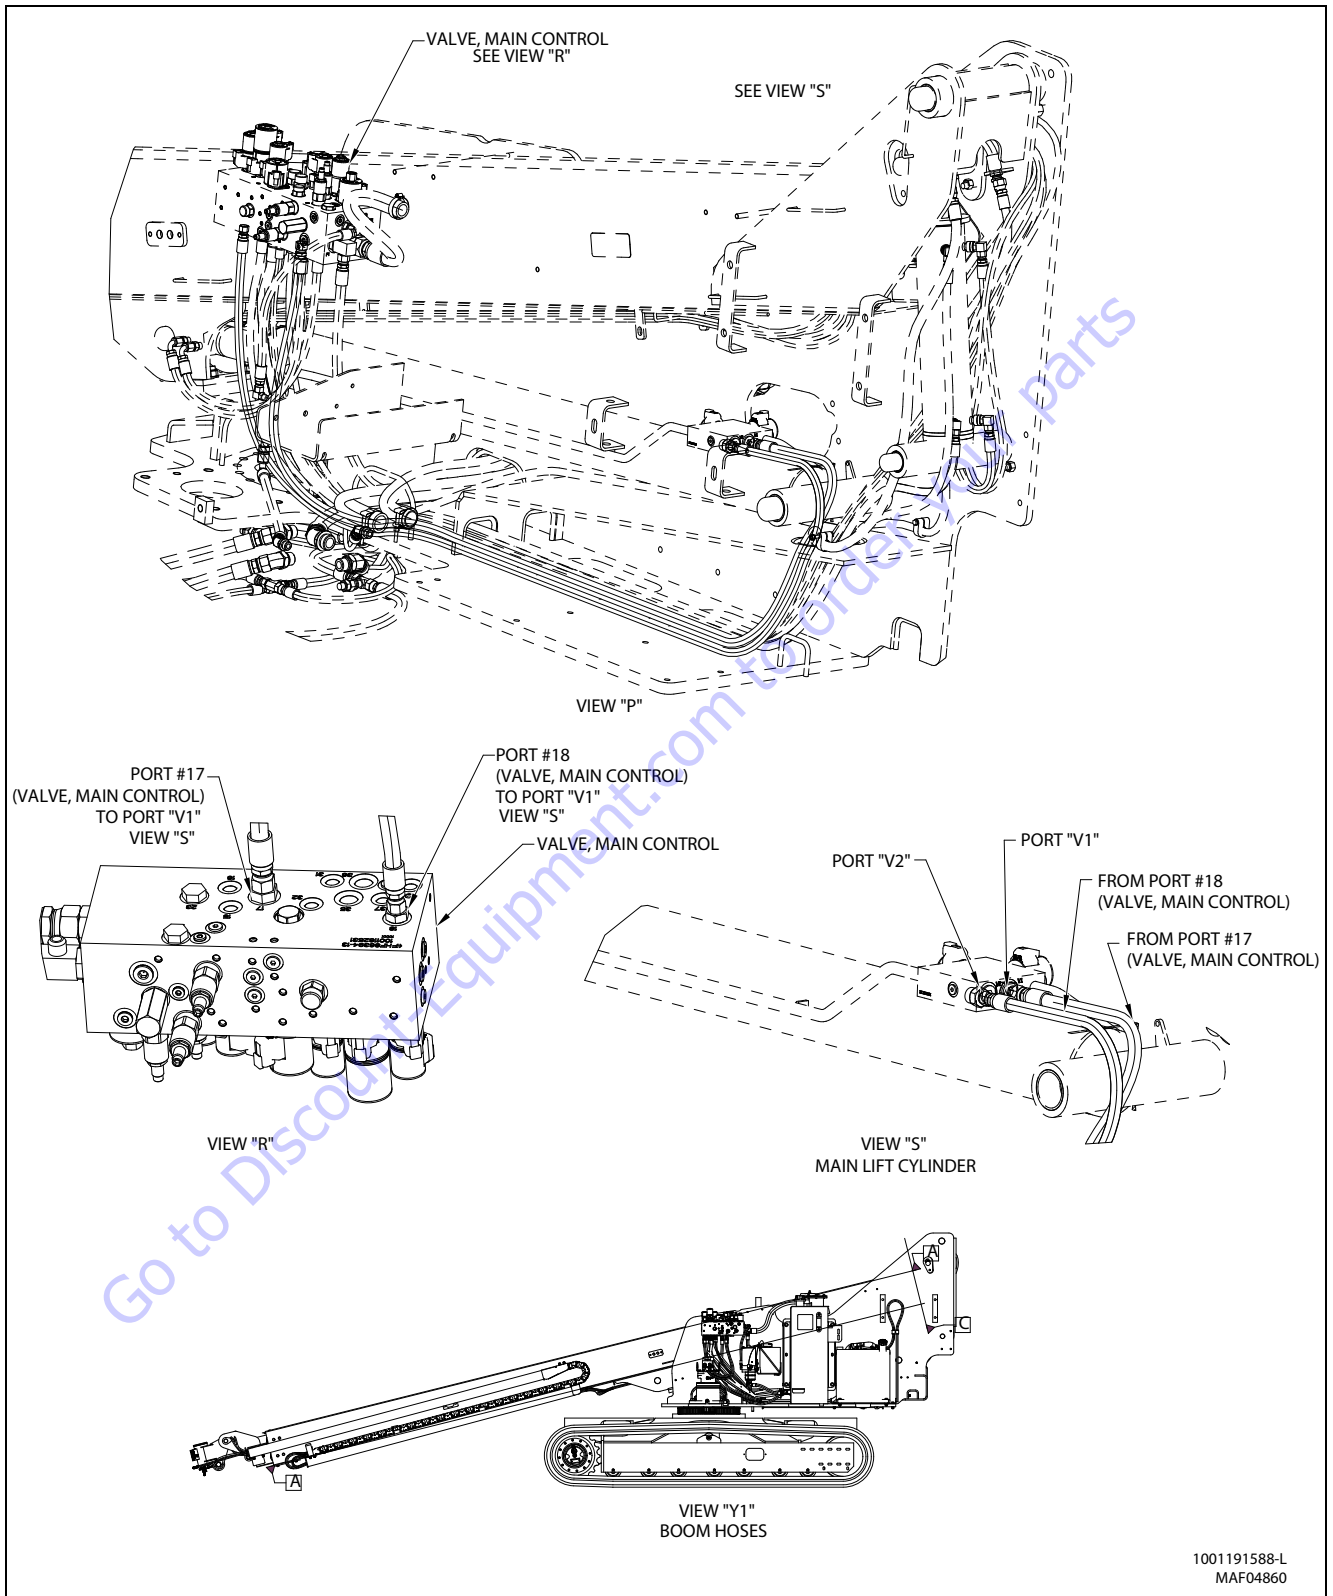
Hydraulic System Installation (400SC) - Sheet 12 of 16
